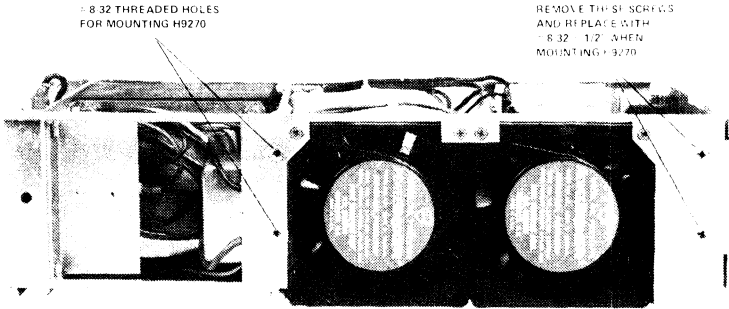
Left Side of H780 Showing H9270 Mounting Holes
